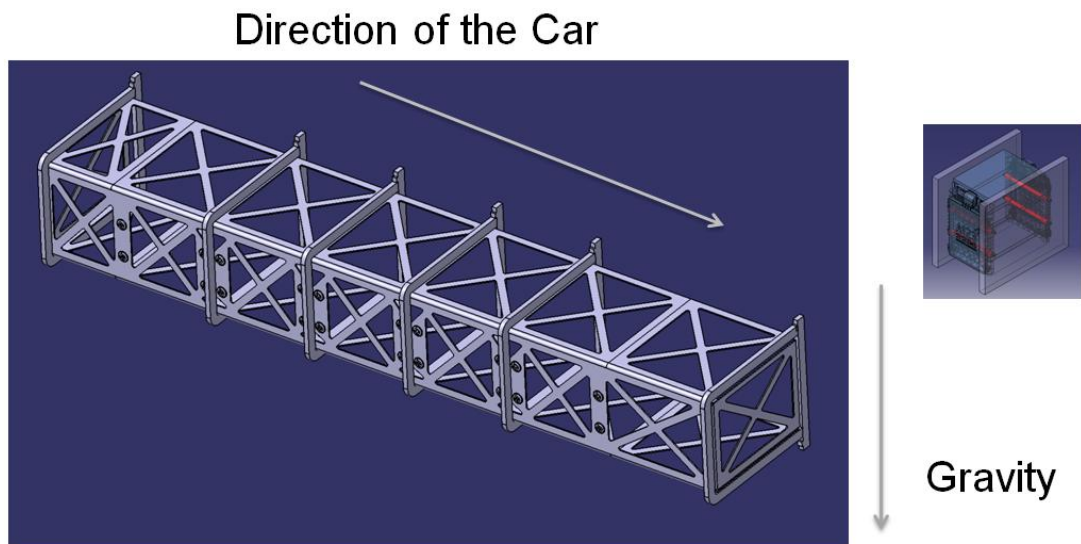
Laser-Cut and Bent Sheet Metal Packaging Design Concept
